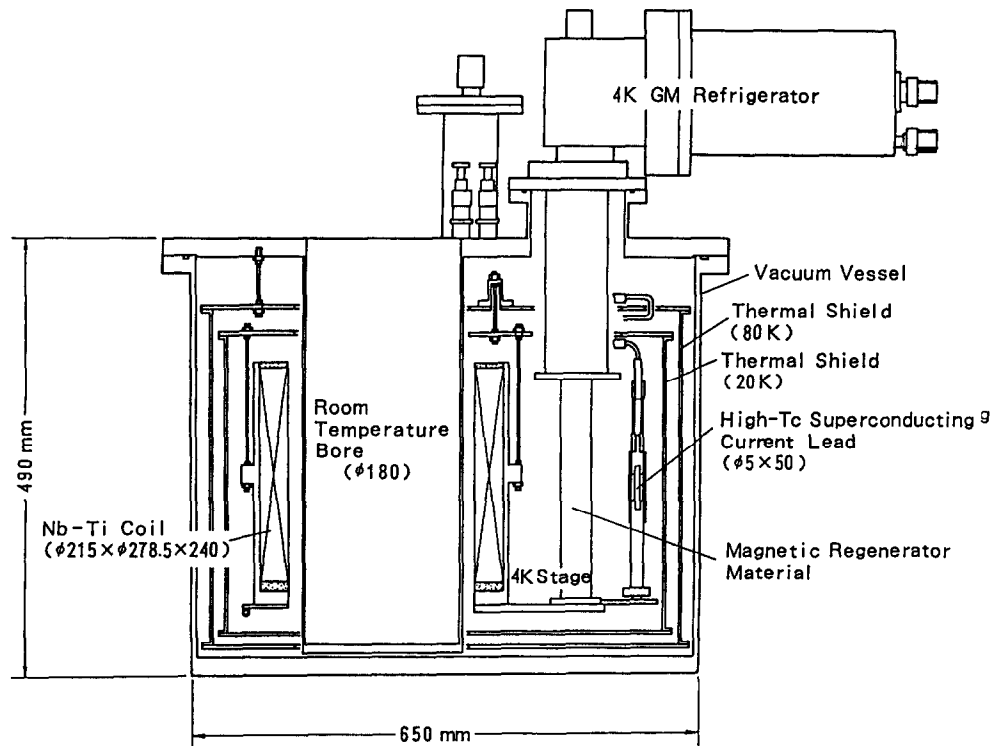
Cross-sectional drawing of 6T-compact SC magnet.
